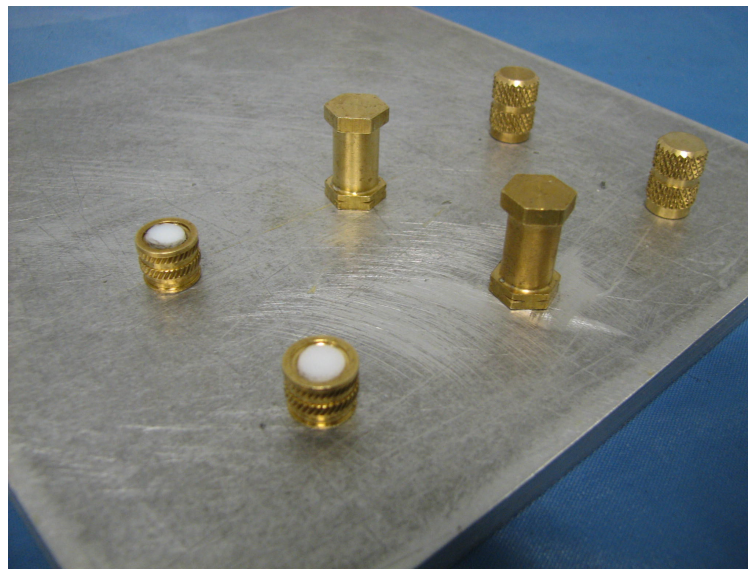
Bottom of Continuous Fiber Molded Plate with Inserts
